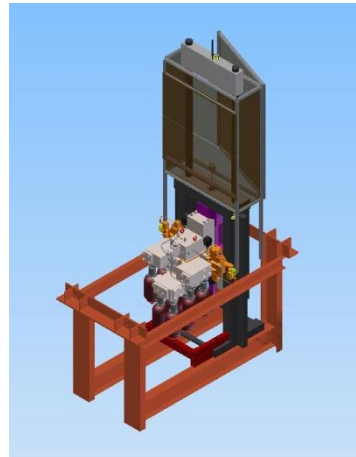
Frame available to build a high speed servo hydraulic test machine
